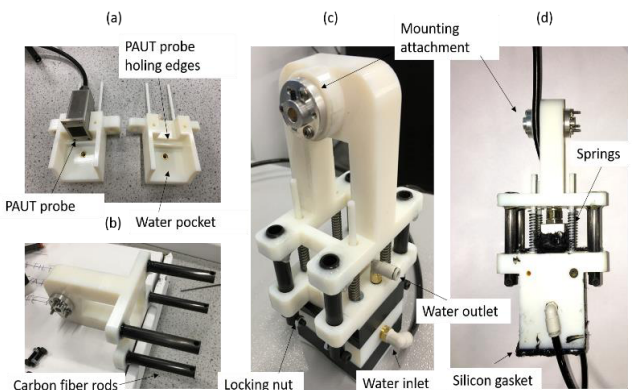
Prototype of the continuous water supply wedge. (a) Water pocket and the PAUT probe. (b) Manipulator attachment. (c)&(d).
